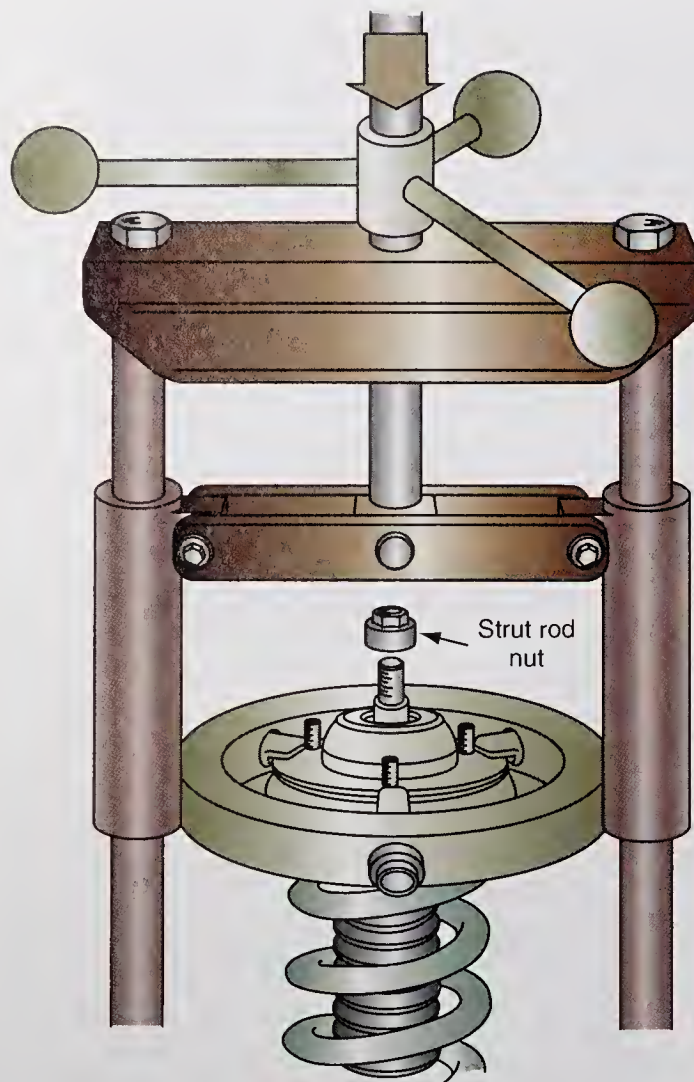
After the compressing tool is operated to removed all the spring tension, remove the strut rod nut.
